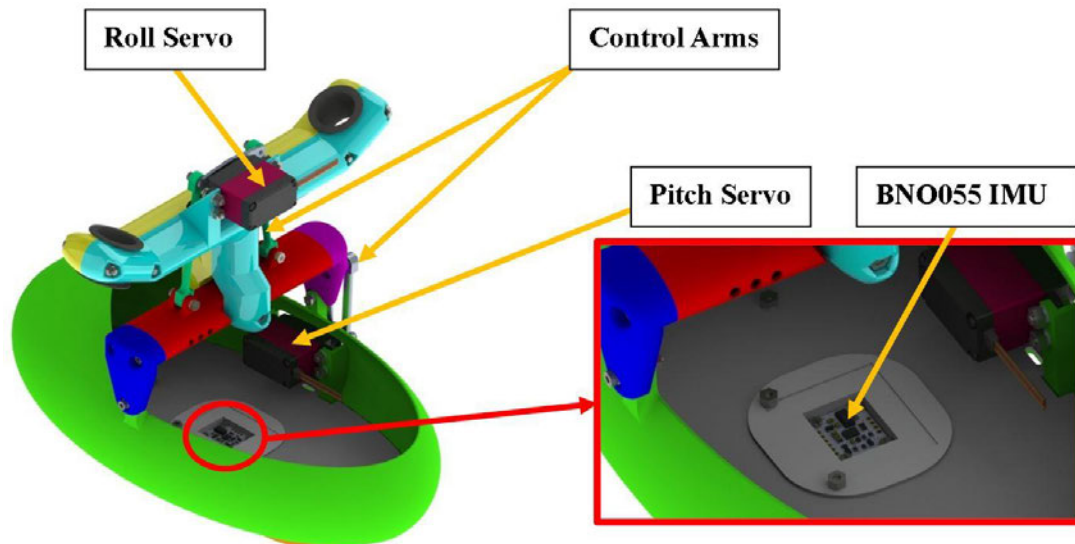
Mounting Location of the ISP, Complete with TPU Dampeners
